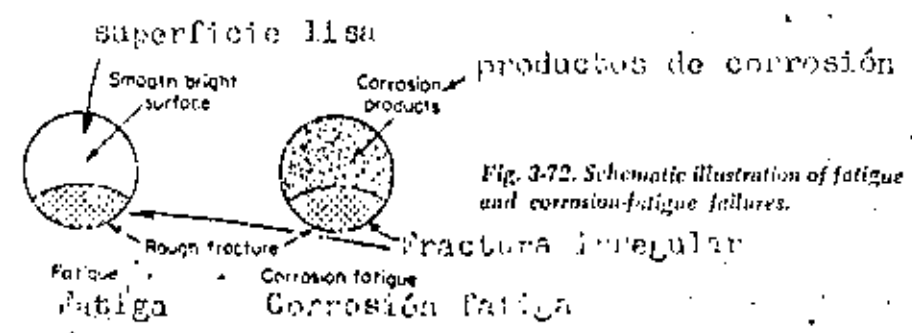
Schematic illustration of fatigue and corrosion-fatigue failures.
